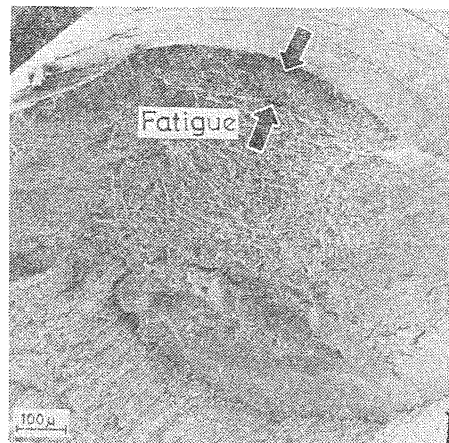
(d) Penetrating condition of the surface crack shown in Photo. 11 (c)
